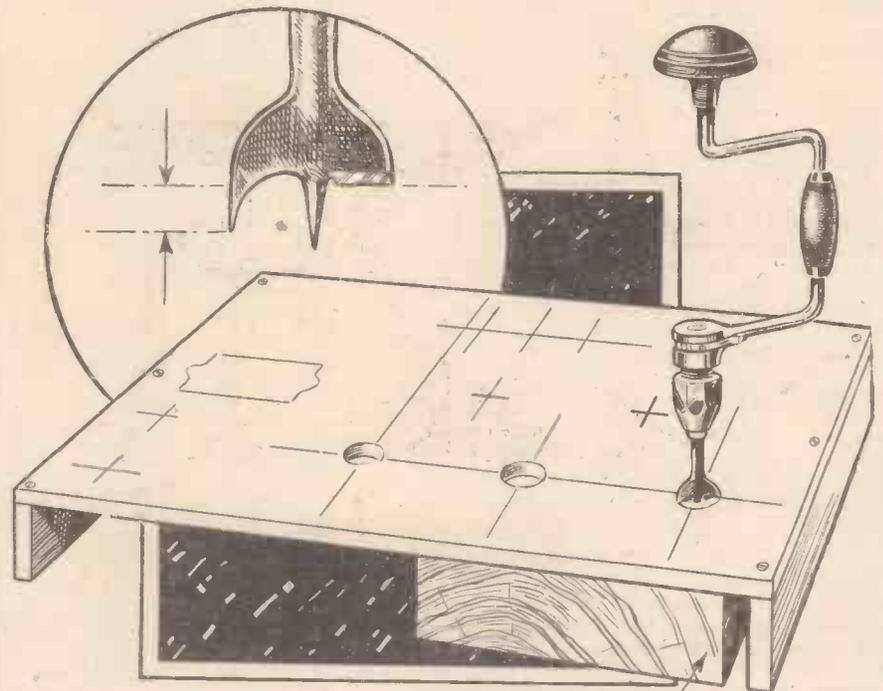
Showing the method of boring valve-holder holes with a centre bit. The bit must be sharp, and the tracing edge should project beyond the line of the cutter, as shown in inset.
